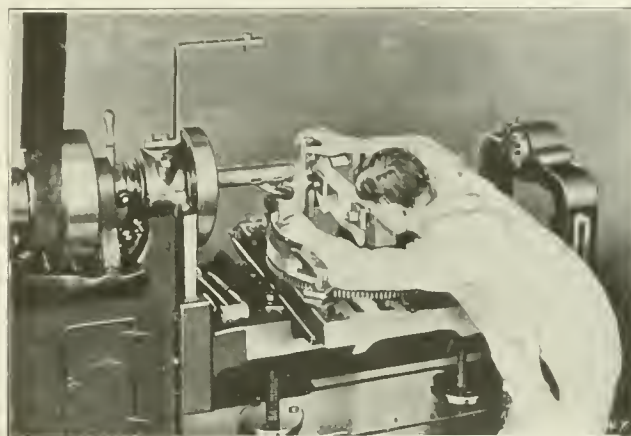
Apprentice setting up Jig for Boring on the Horizontal Boring Mill
